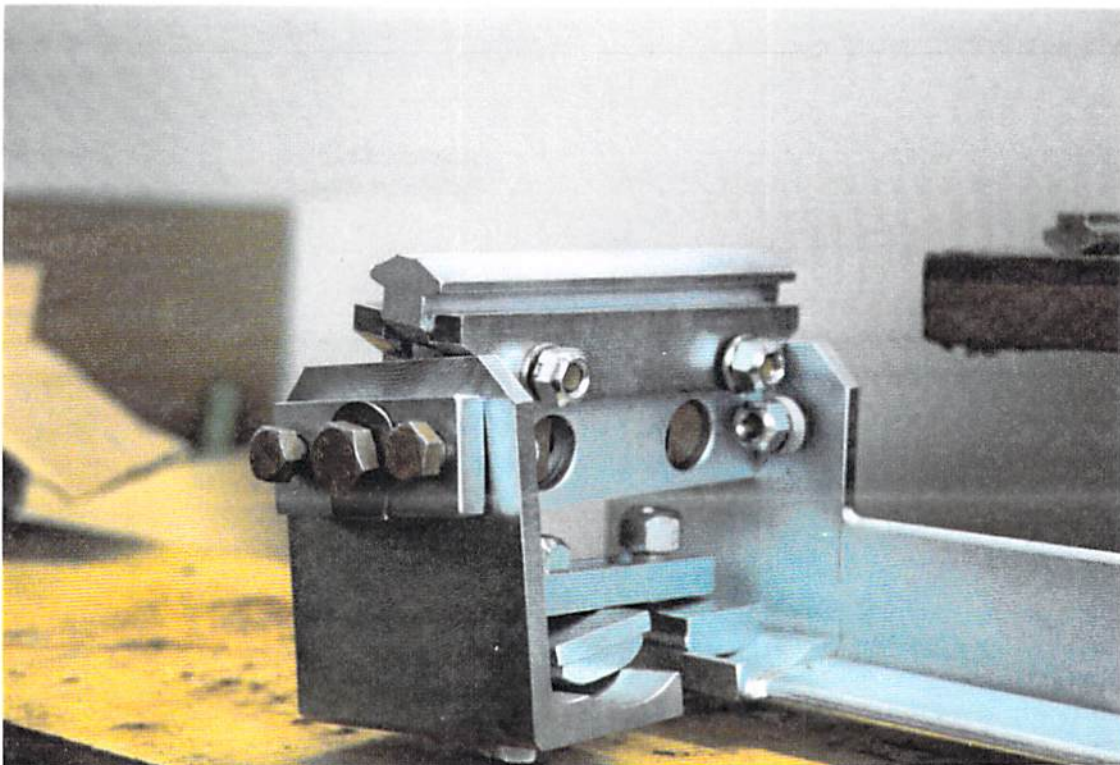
Lufthansa's Stator Pack Fastening System for Use on Steel Guideway
